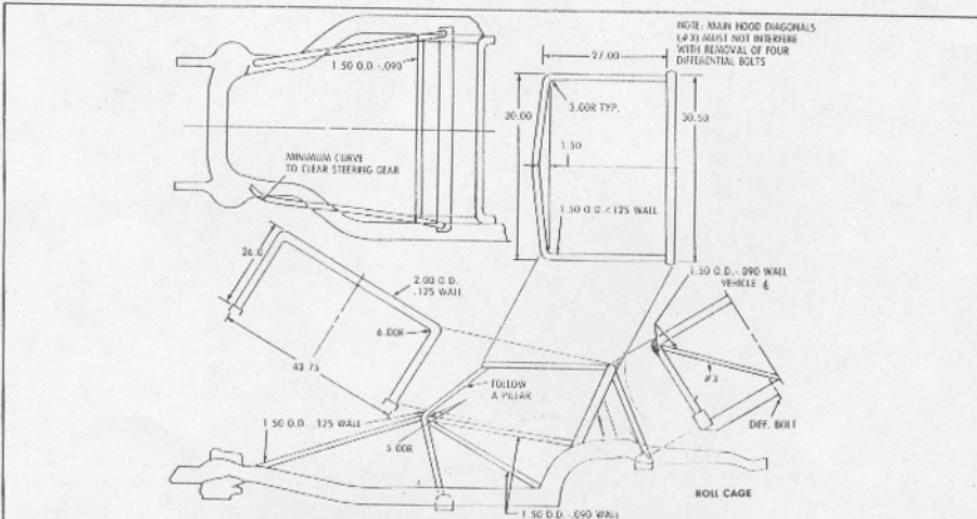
Typical roll cage welded to the frame assembly.
